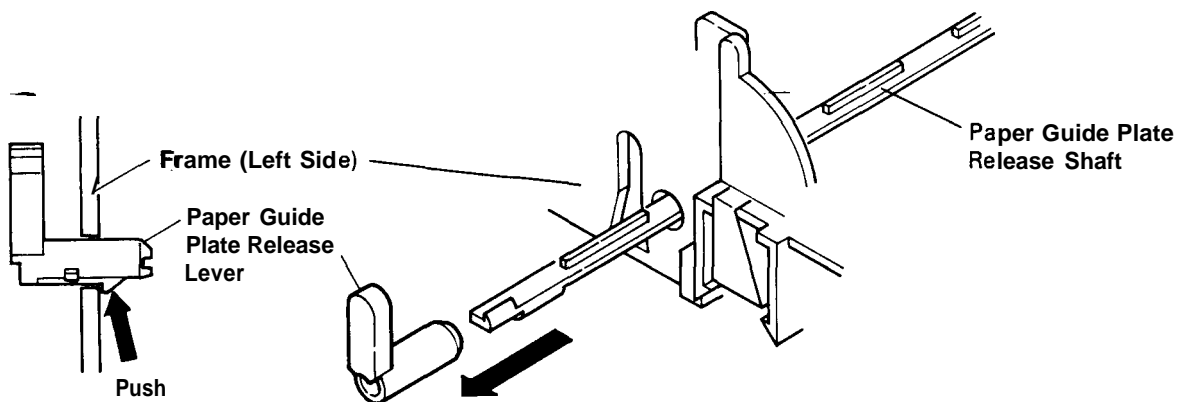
Removal of Paper Guide Plate Release Lever
